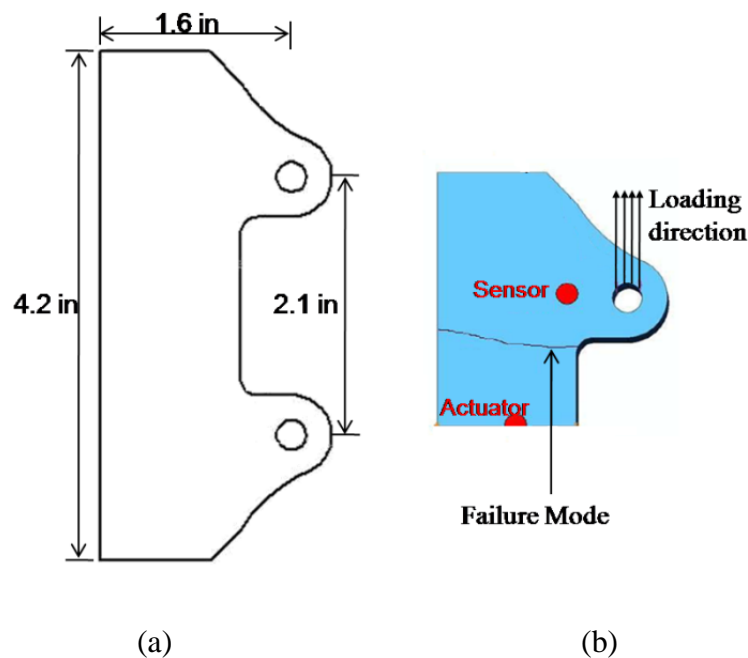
(a) Specimen dimensions and (b) Specimen with sensor/actuator placements and failure modes
